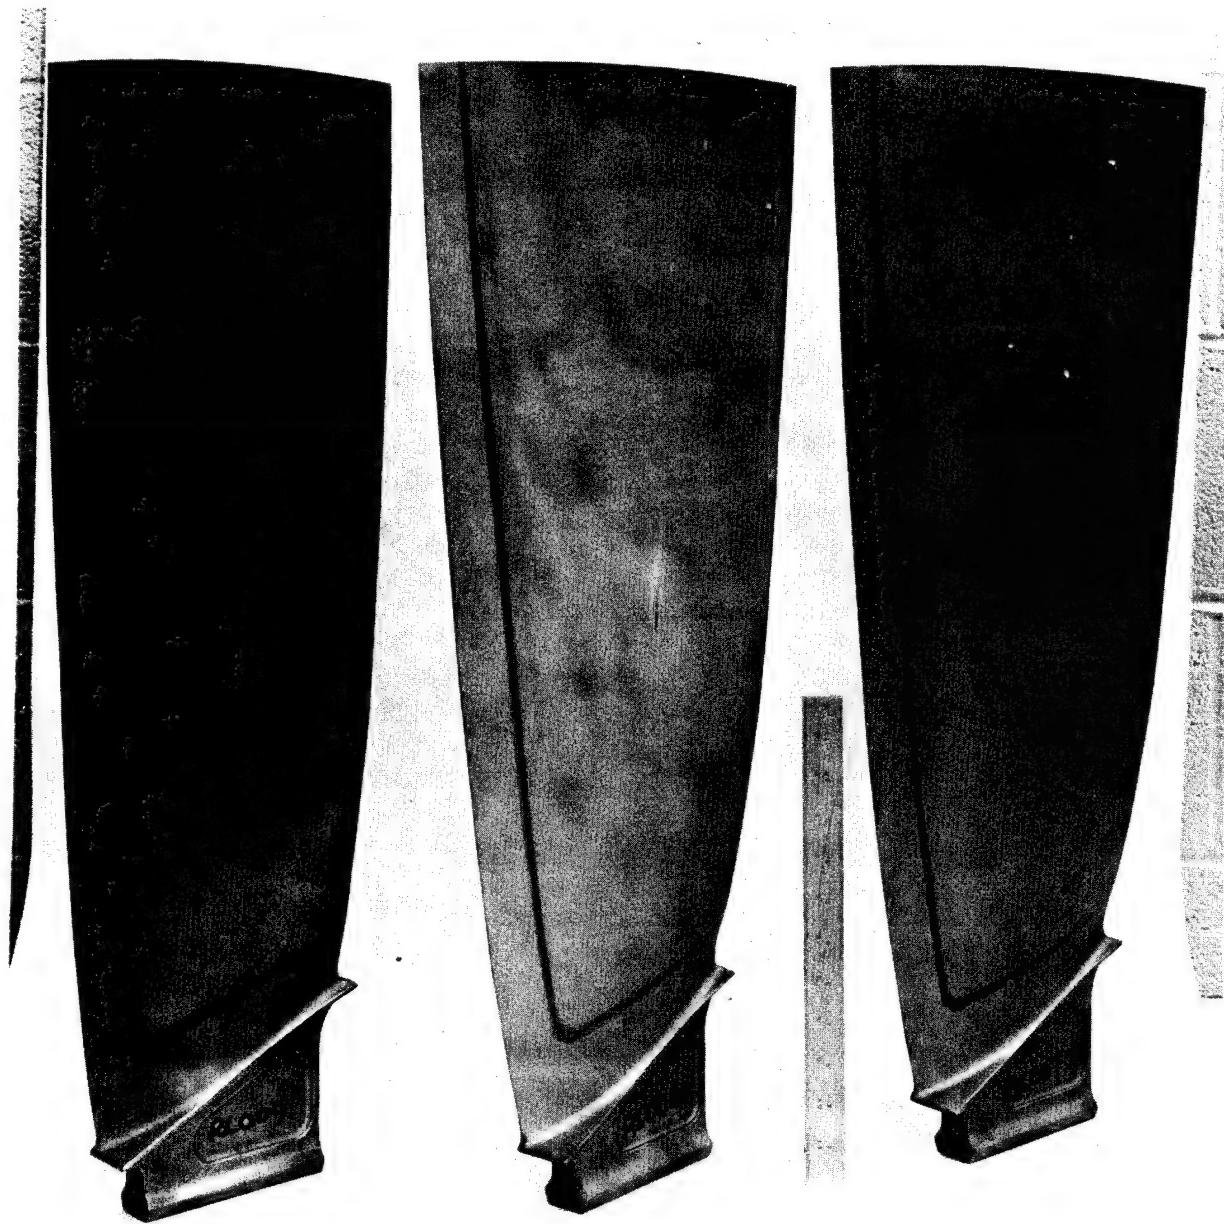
Superhybrid Composite Blades (TiCom) After Manufacturing
